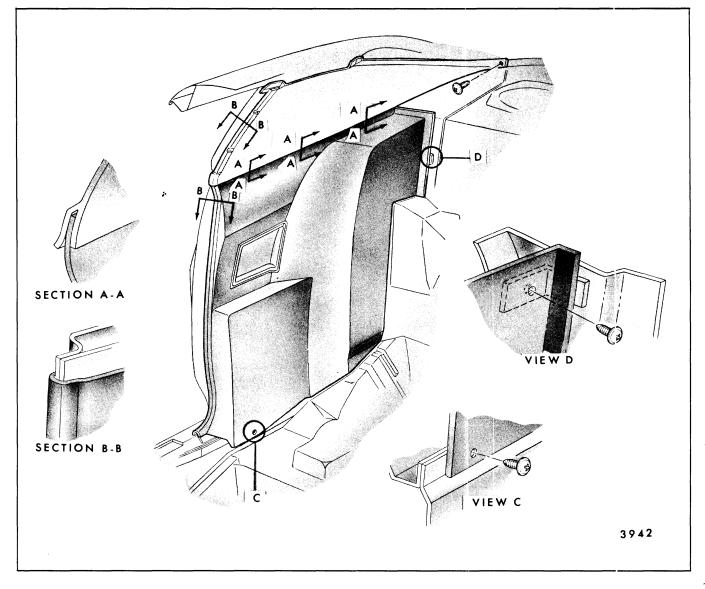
Rear Quarter Trim Attachment - "F" Styles
